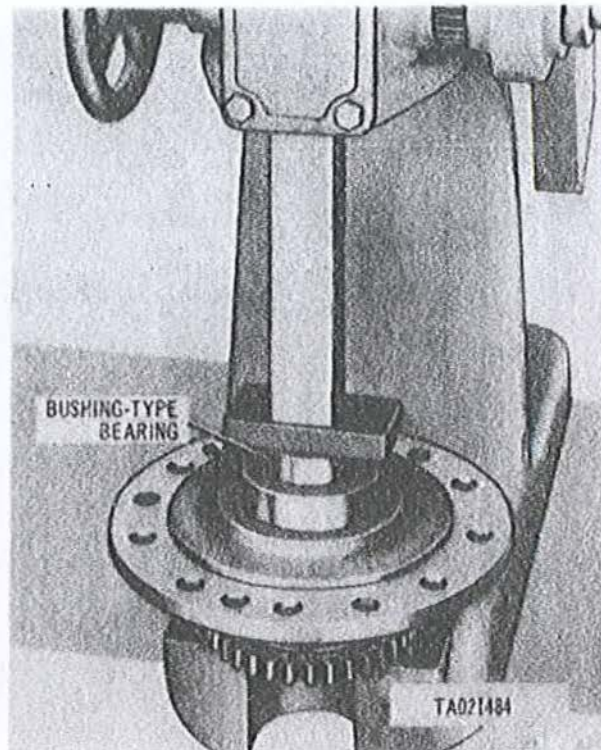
Pressing bushing-type bearing into transmission drive gearshaft, model AVDS-1790-2C and AVDS-1790-2D engines.
